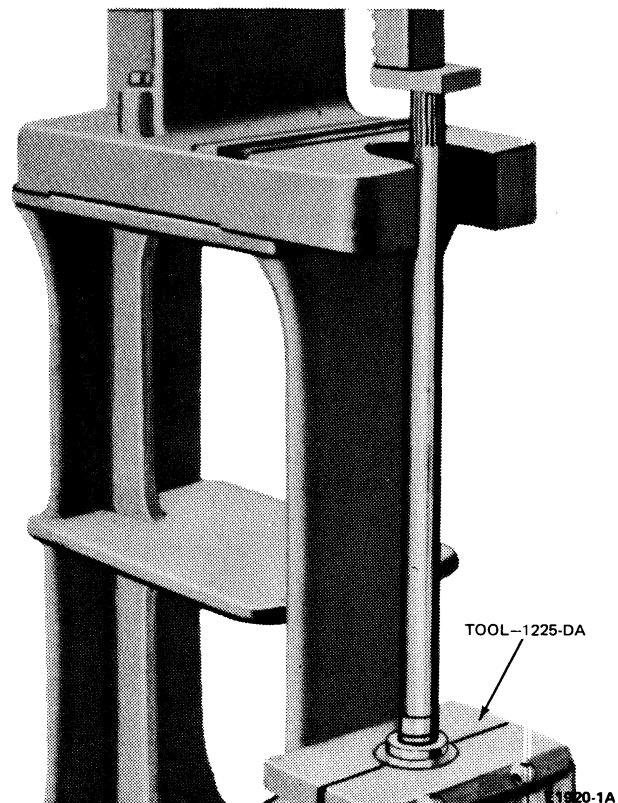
Drilling Retainer Ring—(Tapered Roller Bearing Shown)
